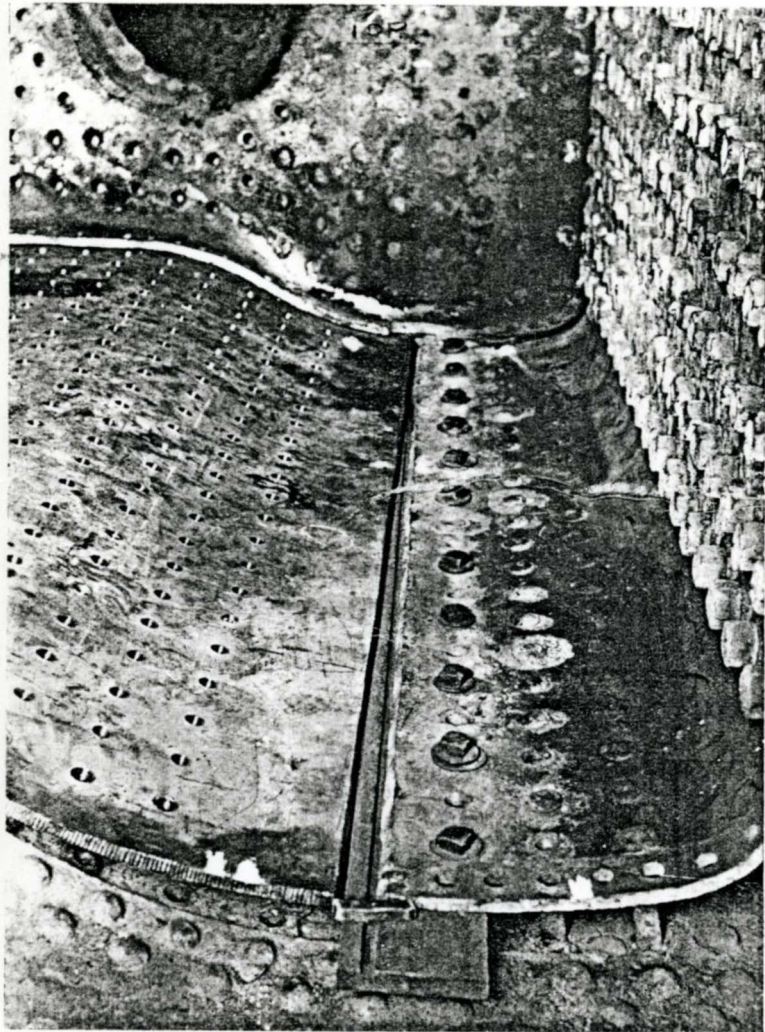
Locomotive firebox. View, from barrel, of the three-quarter wrapper side-plate set up for welding. Note the half-moon piece cut from the flange of the copper firedoor plate to permit access to the far end of the weld. The copper tube plate has been removed.
